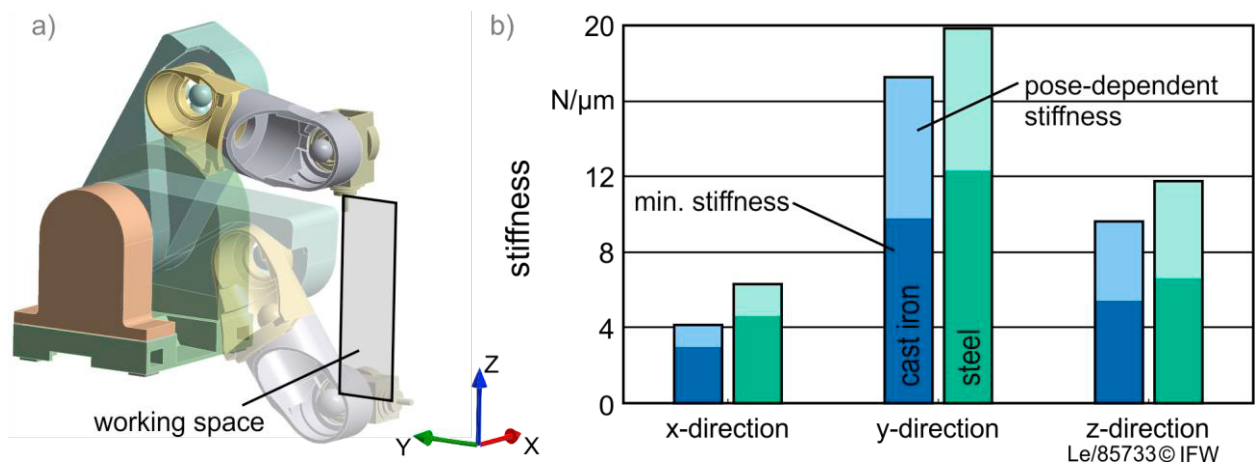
Pose-dependent stiffness of the robot machine tool for horizontal and vertical milling operation
